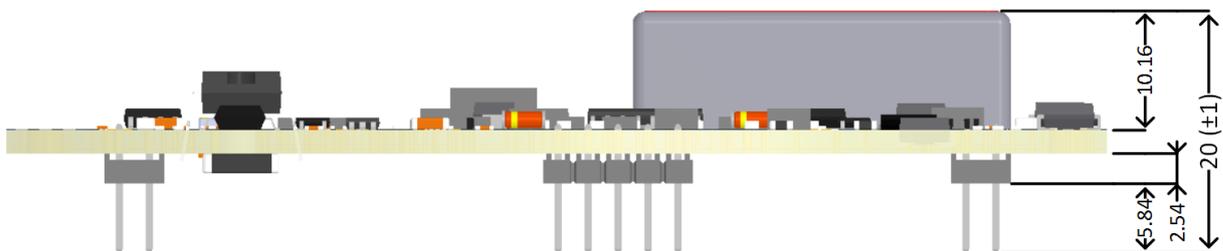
Mechanical view (side view) of FSB-PR. Board-to-board connector version. All dimensions are in mm.
